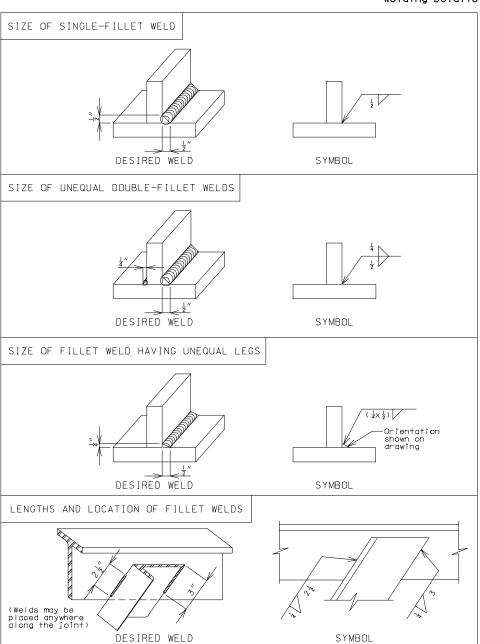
Application of Symbols - Fillet Welds - Dimensions
